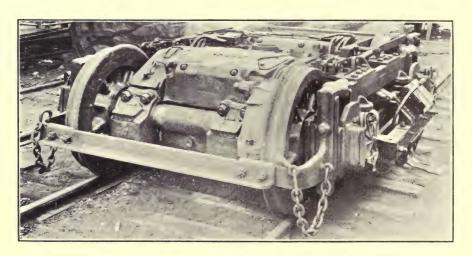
West Jersey & Seashore Railroad, Motors Mounted on Brill Trucks. G. E., No. 69, 240 h. p., 600-volt, direct-current motors.
